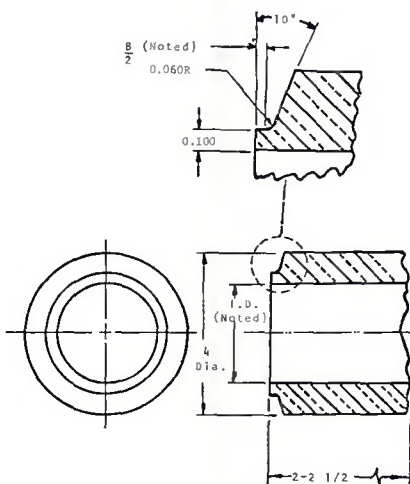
One-half of a ring assembly showing joint design used for both 3 and 3 1/2 in. ID rings. For the tightly butted assemblies three values of the groove size parameter  $B$  (0, 0.075 and 0.150 in.) were used for each wall thickness
